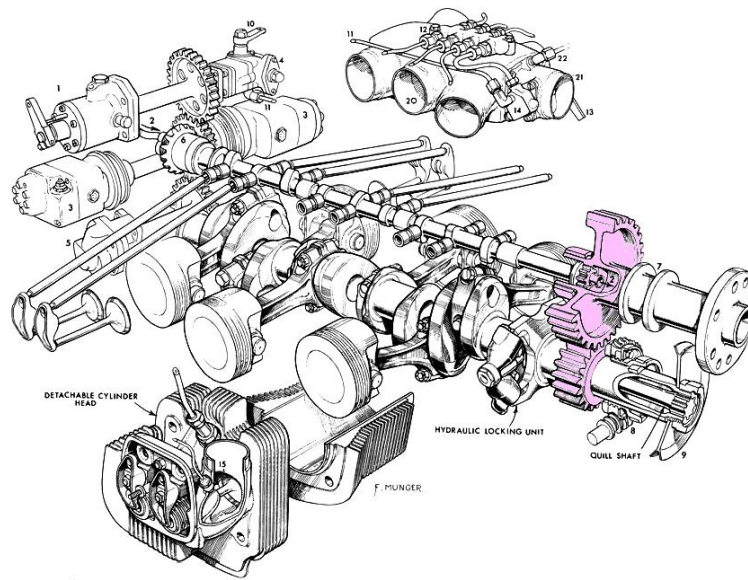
Gear-type reduction drive on a Continental Tiara engine
